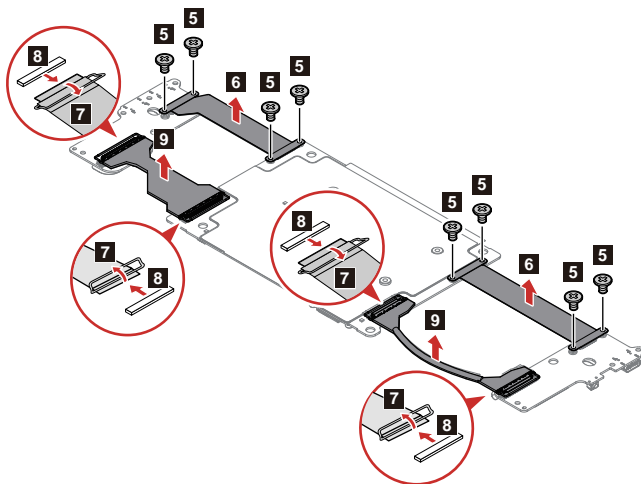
Remove the I/O board FPC, the I/O board cables, and the I/O boards
